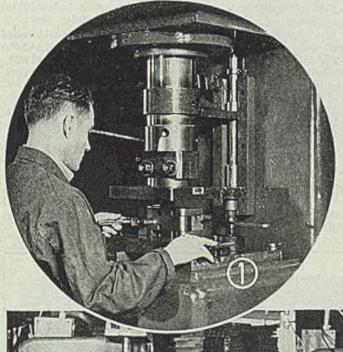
Closeup of special enclosed die used in 25-lon hydraulic press for simultaneously upsetting the heads of four rivets that hold together a group of laminations forming a pole piece for an electric motor or generalon.
